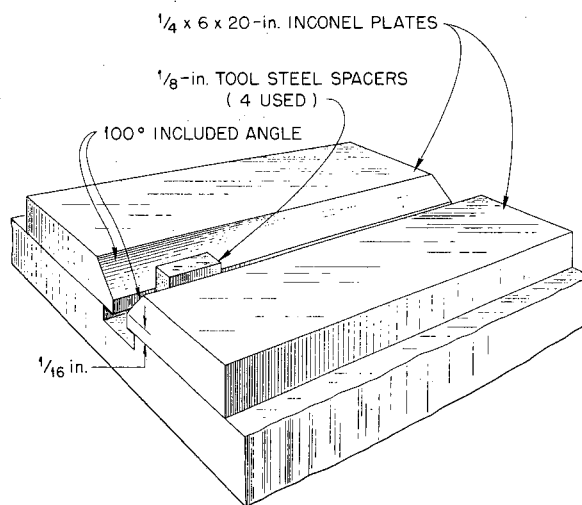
Assembly of Inconel Weld-Shrinkage Test Plates Prior to Welding.
